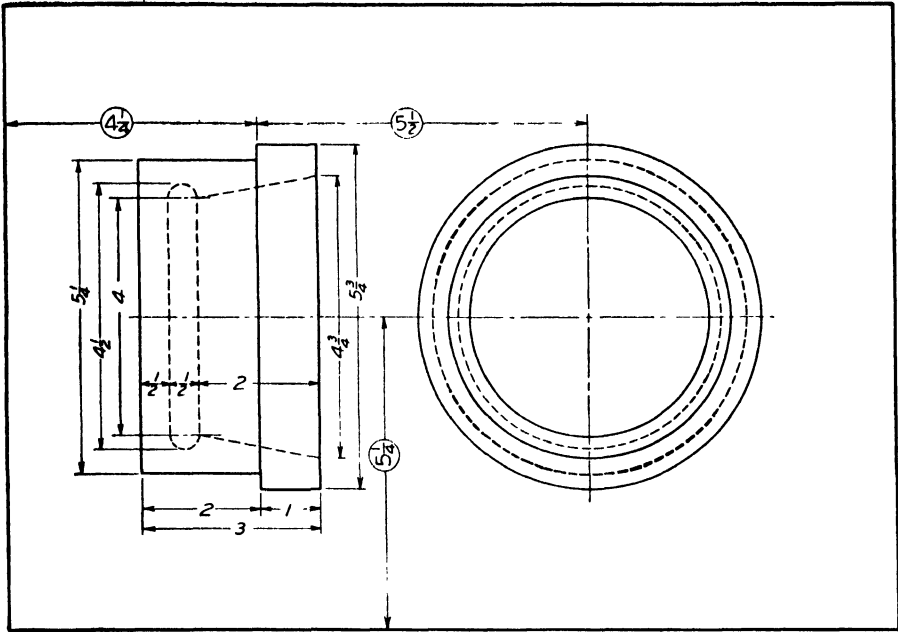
Prob. 145. Make a two-view drawing of the *shaft cap*, the left-hand view to be a full section.
